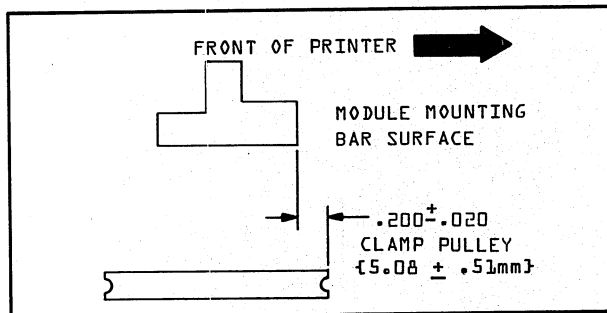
PAPER CLAMP PULLEY SET-UP
